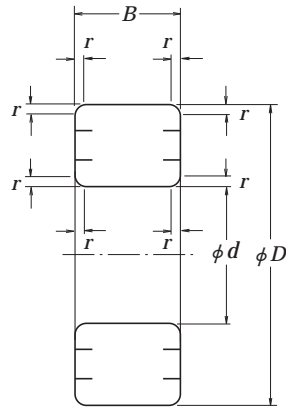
Boundary Dimensions of Radial Ball and Roller Bearings
